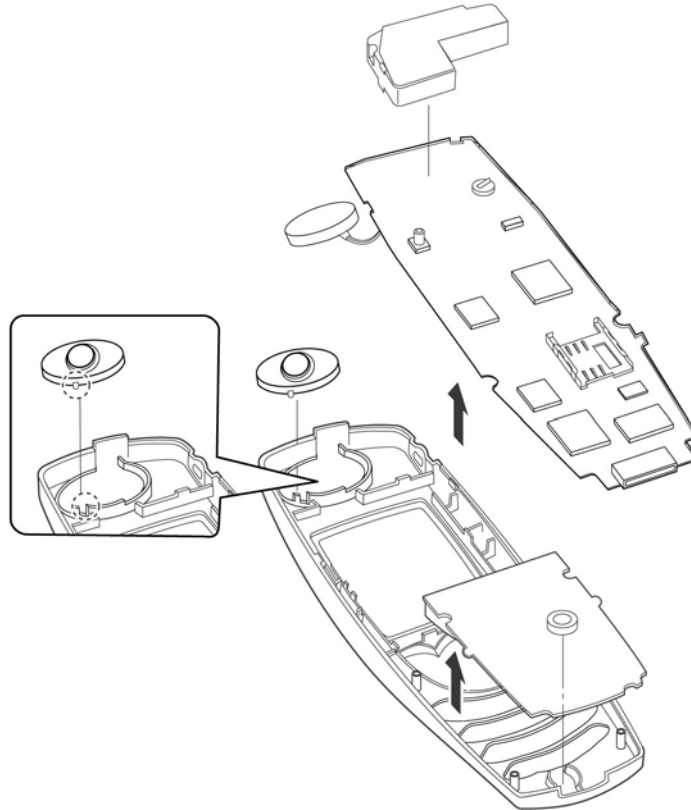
Removing PCB, Antenna, Receiver and Keypad.
